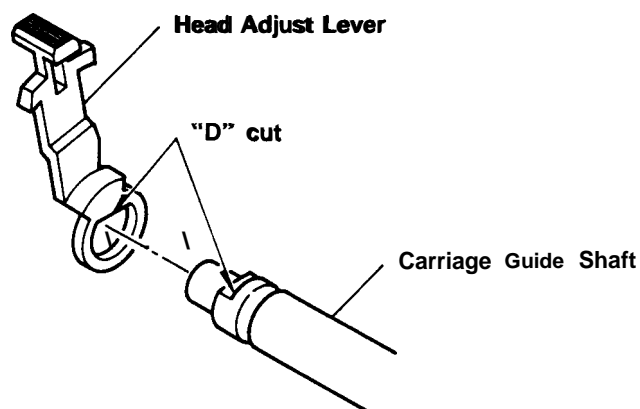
Carriage Guide Shaft and Head Adjust Lever
